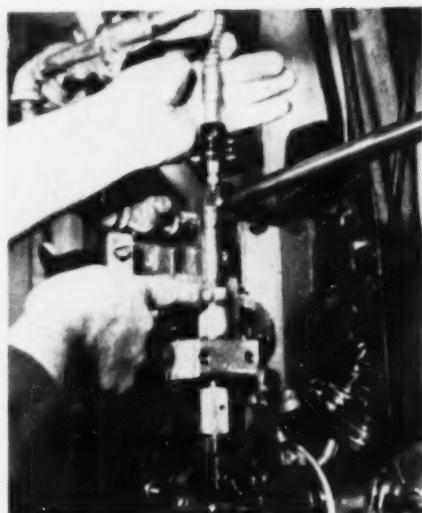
Foredom ball bearing handpiece mounted in a vertical slide, with quickly detachable handpiece connection coupled to Lamson Products specially developed flexible drive shaft
